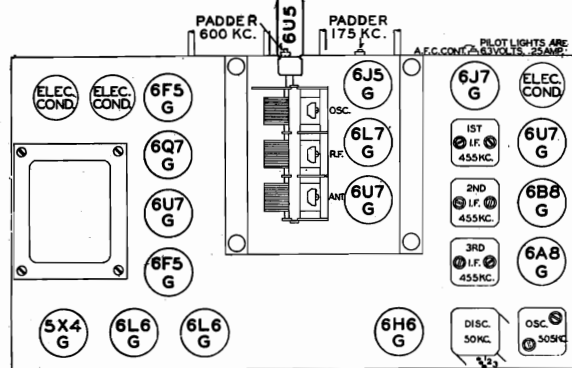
B CHASSIS LAYOUT (TOP VIEW)
